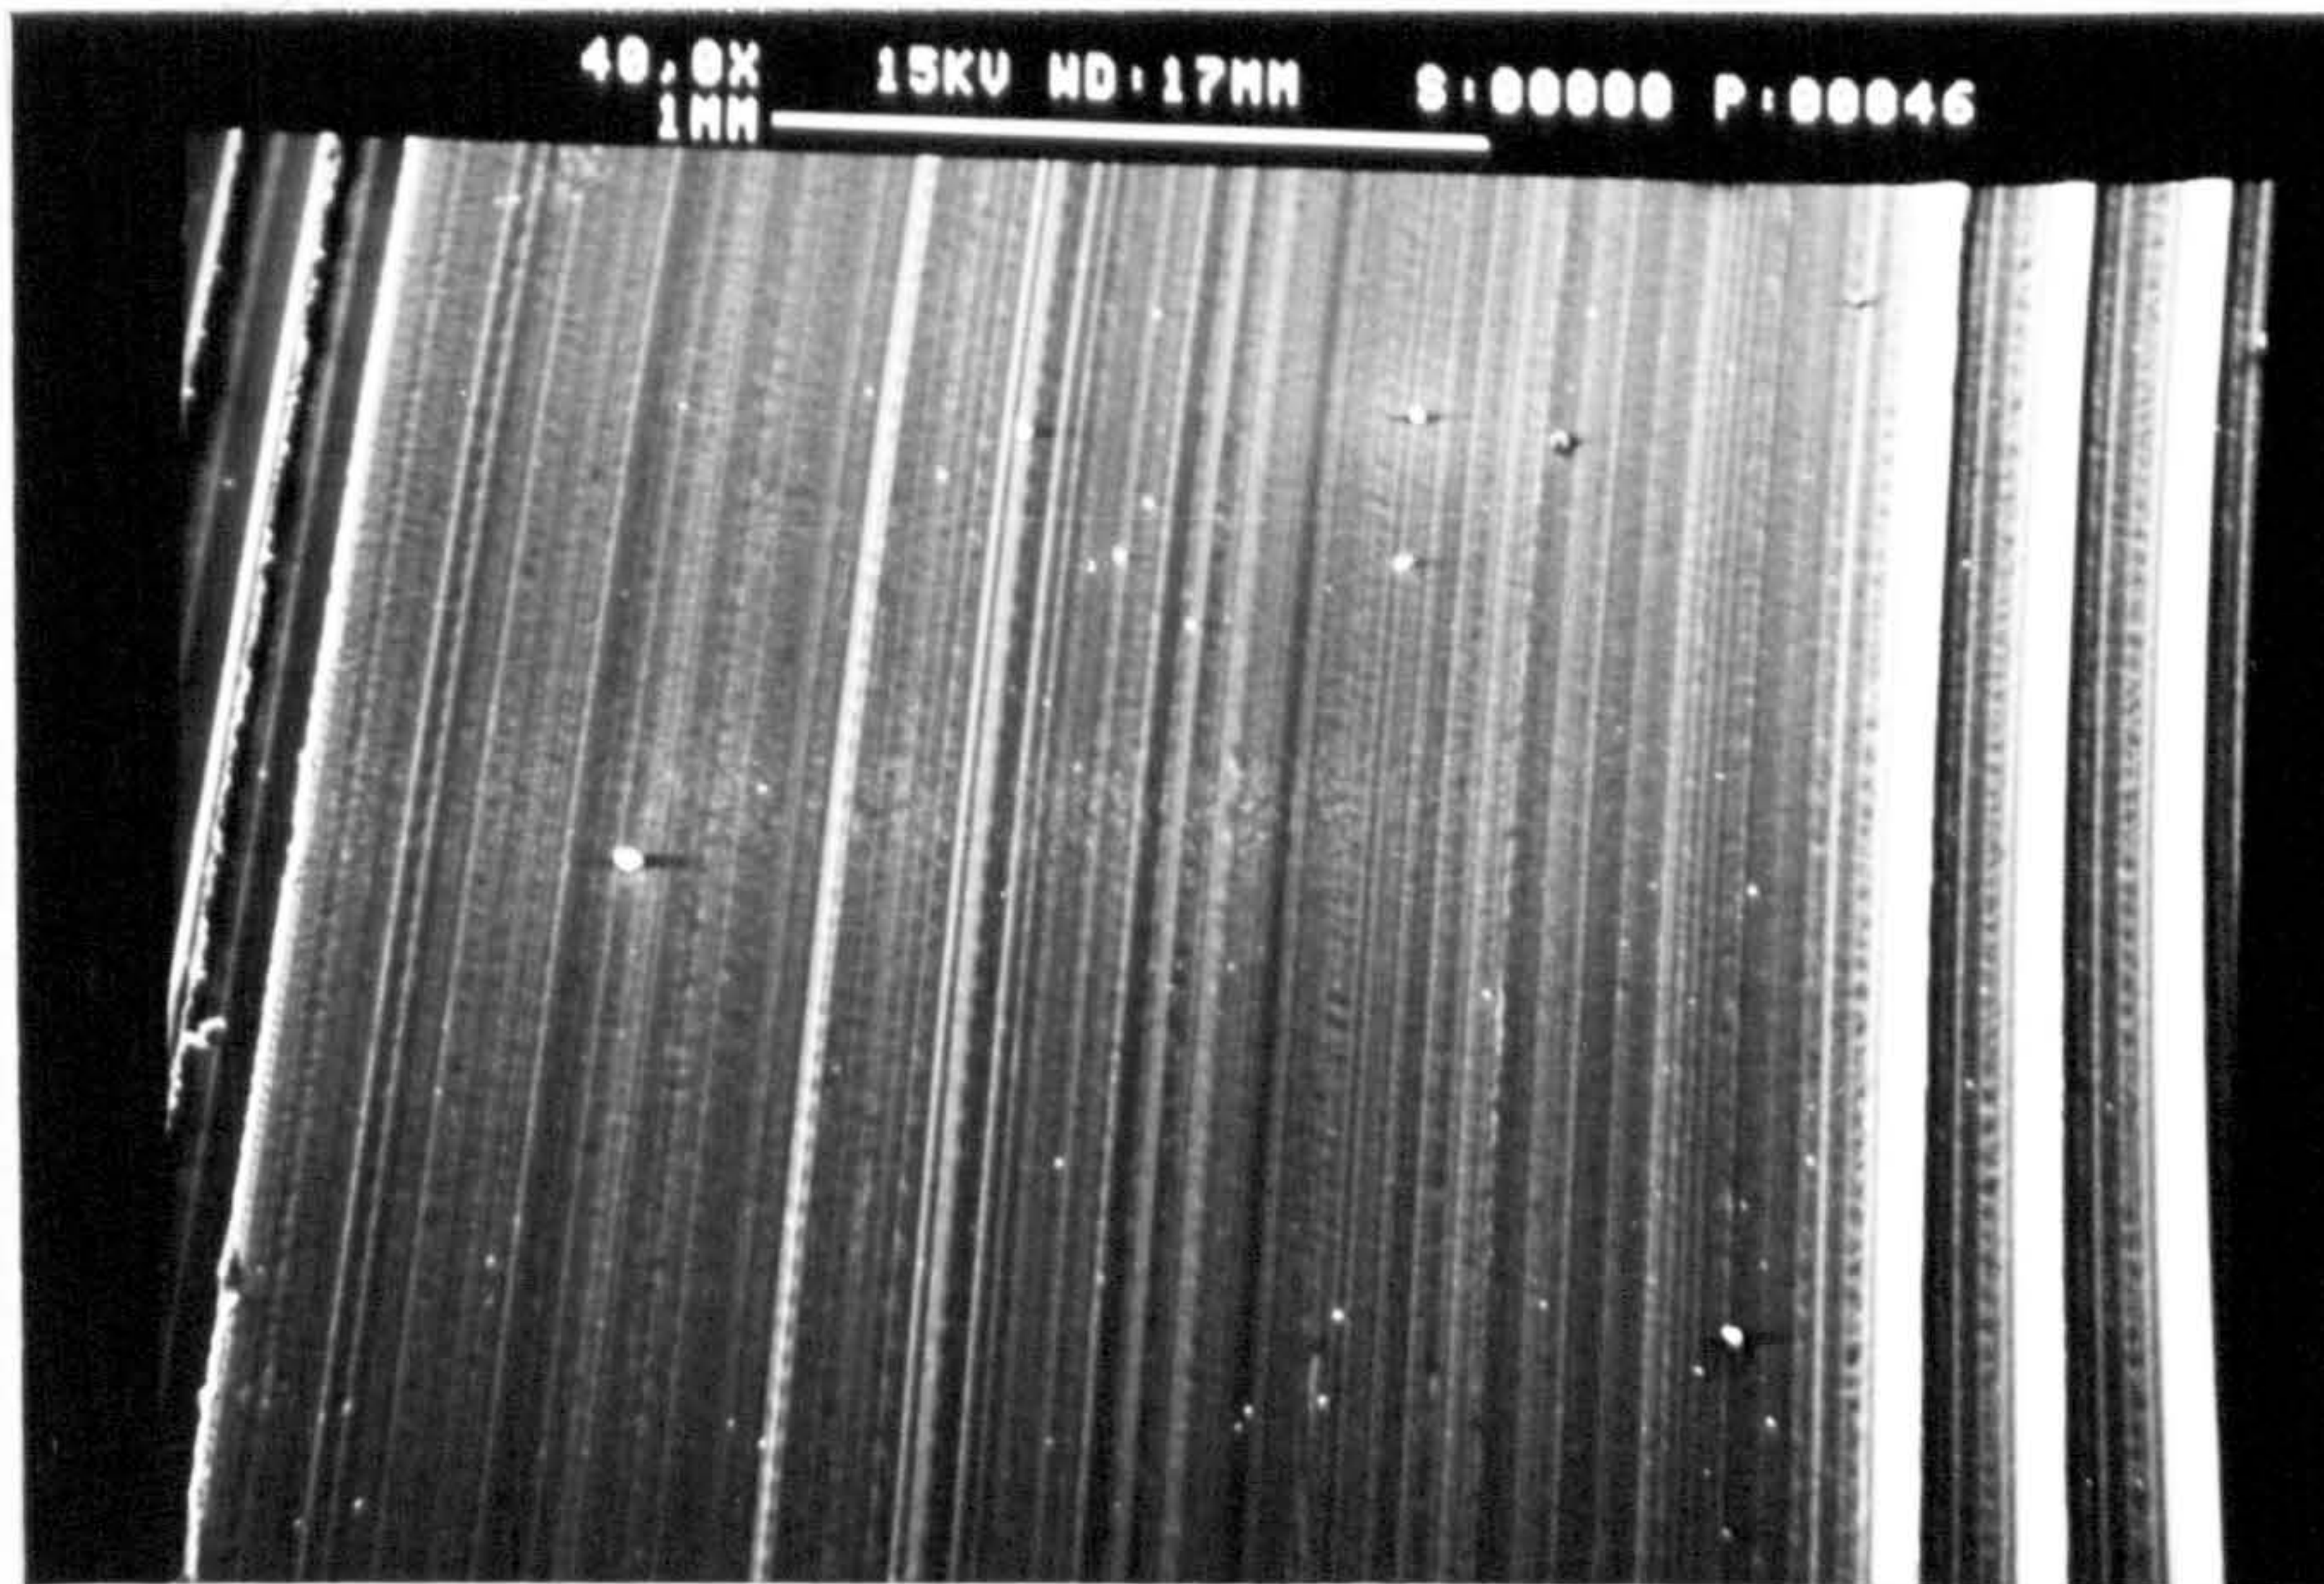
HDPE surface machined at  $30^\circ$  rake angle, showing groove formation. (Speed = 30 m/min, feed = 0.25 mm/rev)
